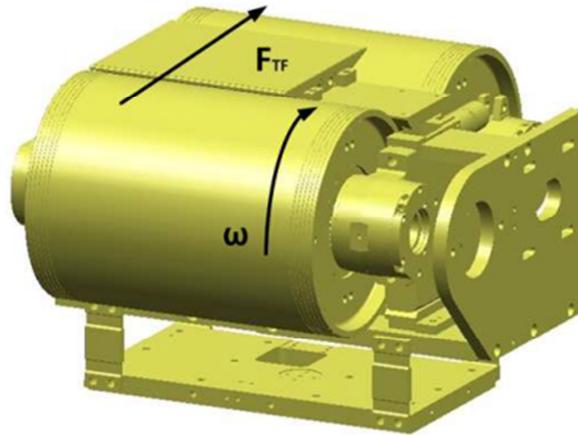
Wheel drive unit (courtesy of Volvo Car Corporation)
